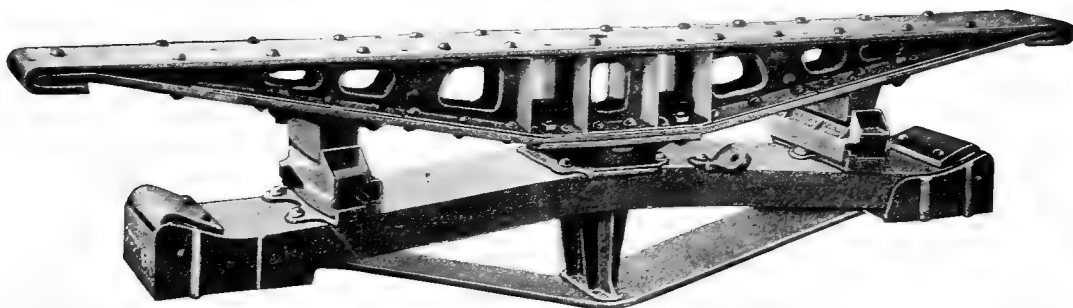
Simplex Body Bolster with Cast Steel Web Filler, in Position on Simplex Truck Bolster with Susemihl Roller Side Bearings. American Steel Foundries.
